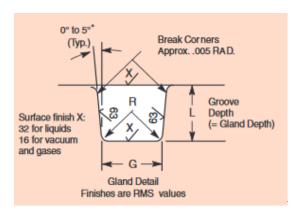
Parker Handbook diagram for designing face seal o-ring grooves
